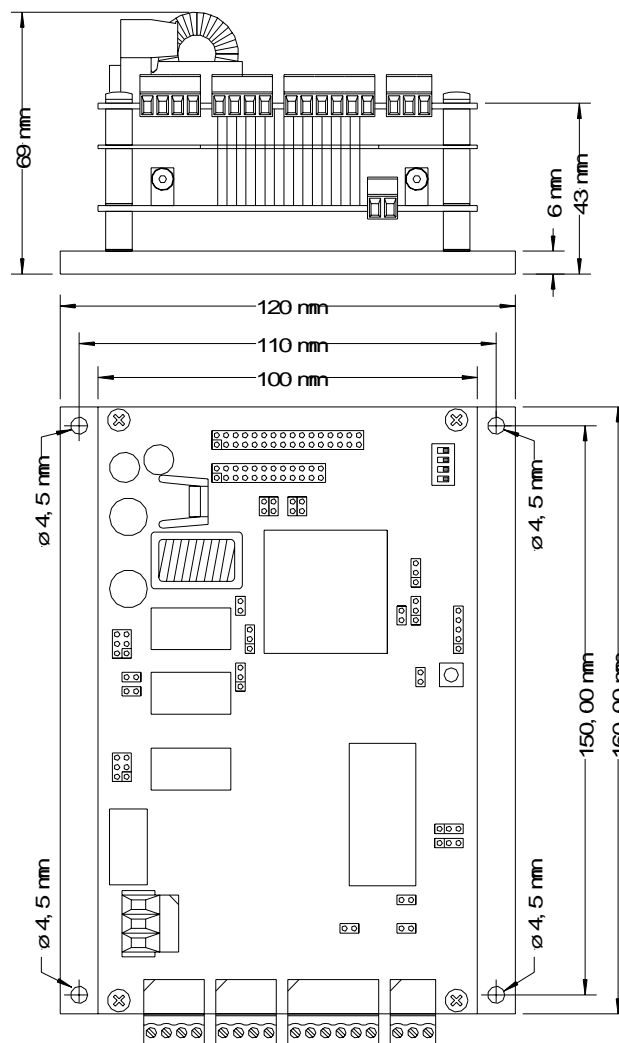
Dimensional drawing of the ID ISC.LRM200-A/B Reader
